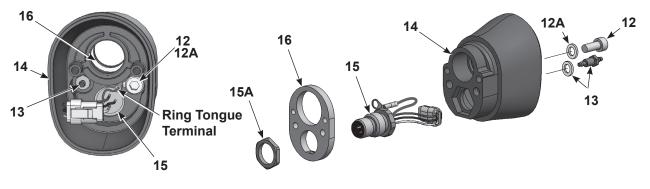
Tube-Mount Gun Disassembly 5 of 5
